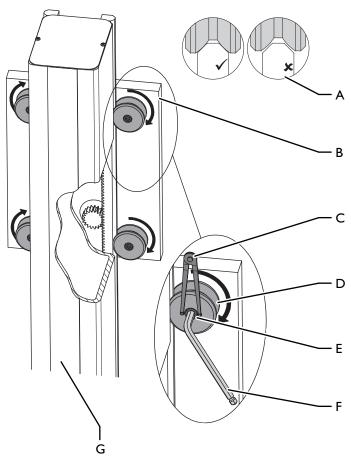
Setting the rollers: Prism guideway, eccentric rollers
